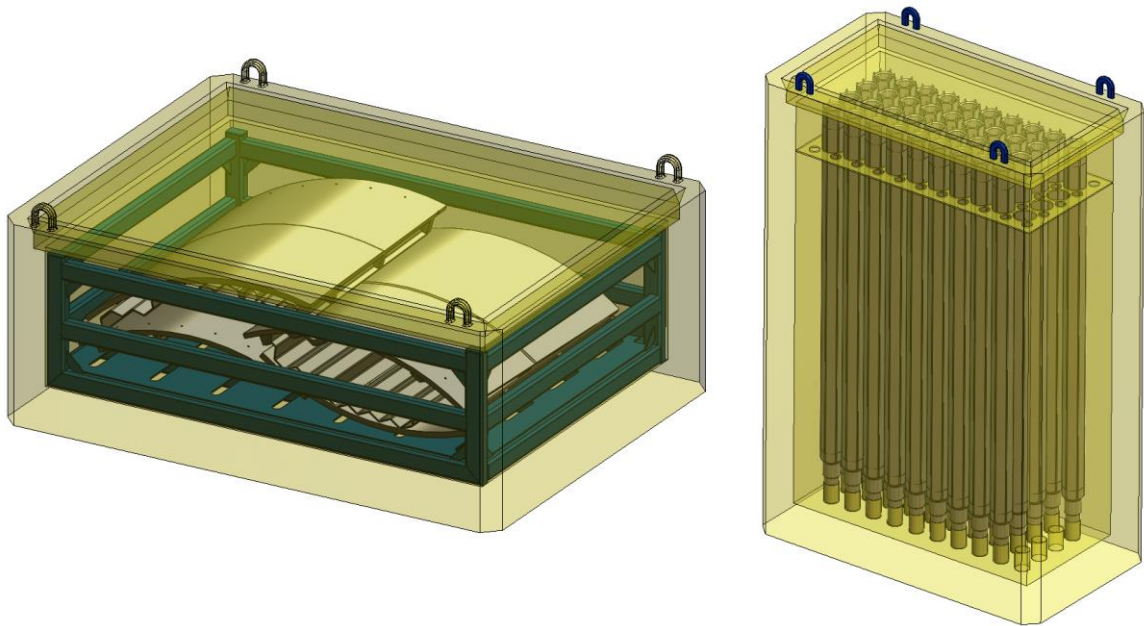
On the right four pieces of the core basket placed in a lifting basket inside a S2-200 package and on the left a S3-package filled with 37 shield elements.
